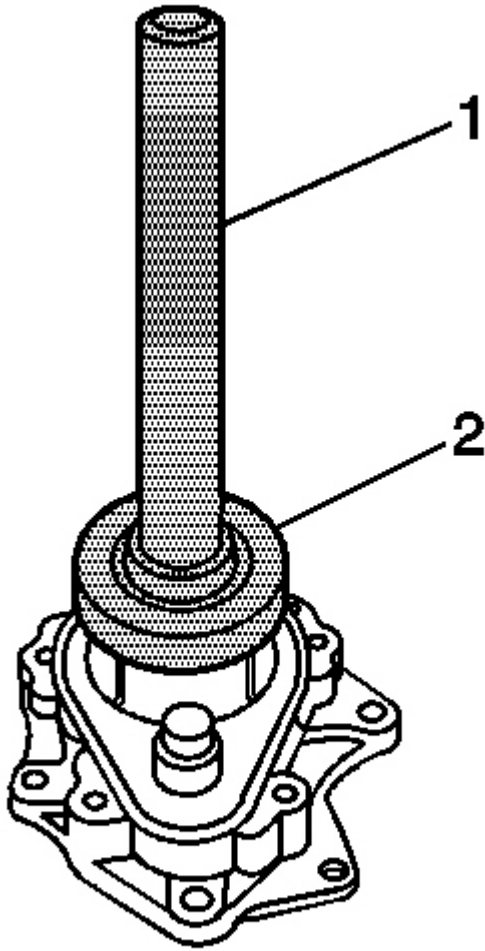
Identifying Axle Seal Installer & Universal Driver Handle
